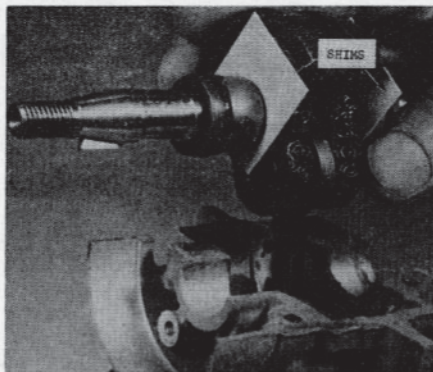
View showing placement of shims (Fig. HL242) between thrust washers (15—Fig. HL241) and bearings (14) for correct crankshaft assembly. Refer to text.
